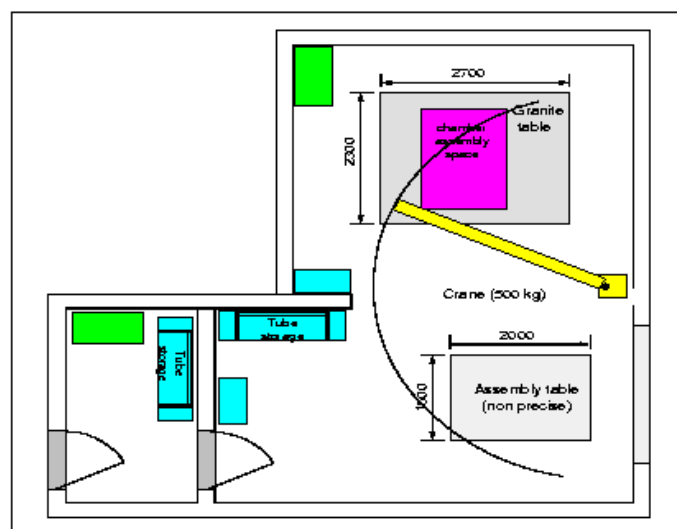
Layout of the clean room showing the location of the assembly tables and the crane.
